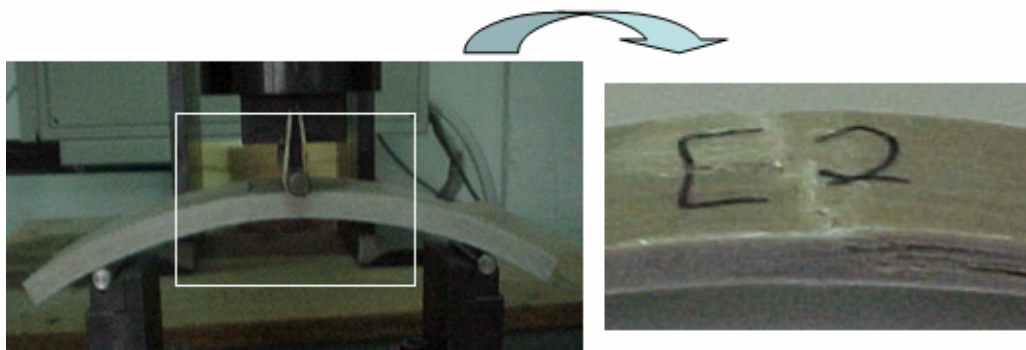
Delamination on the loading section of a specimen tested in three-point bending with the concave side down.
